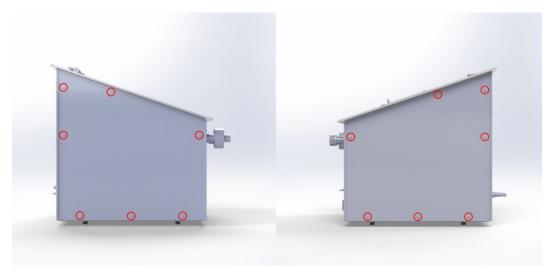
Remove the bolts in the red circles to remove the sides of the panel
